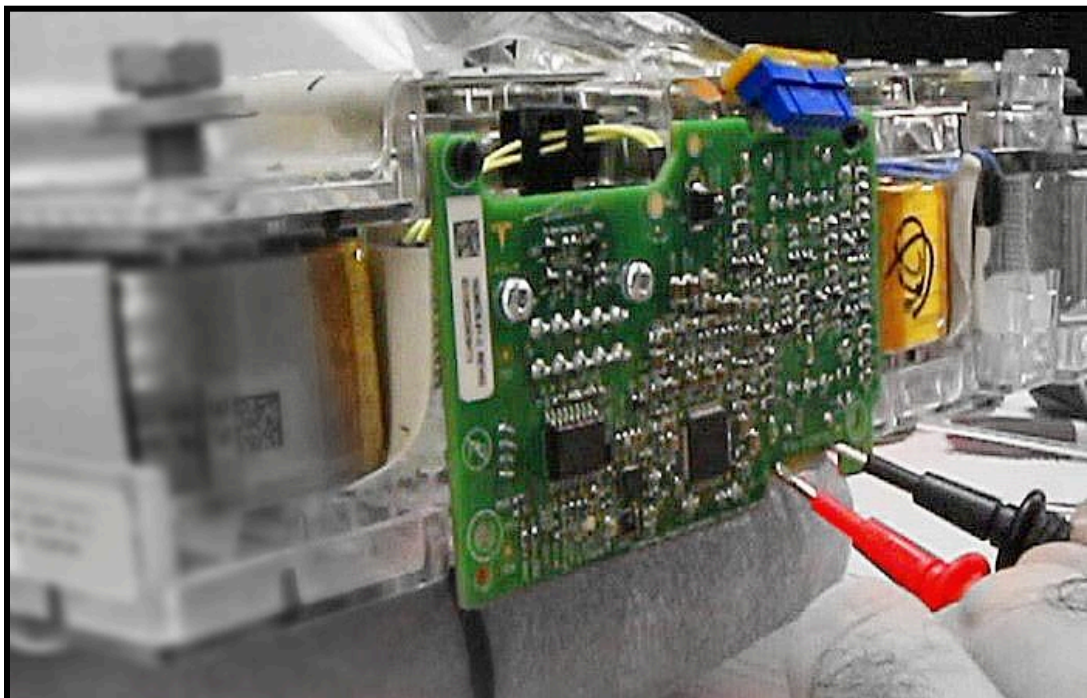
Using multimeter probes as a tool to pry the ribbon connectors out of the old board.
